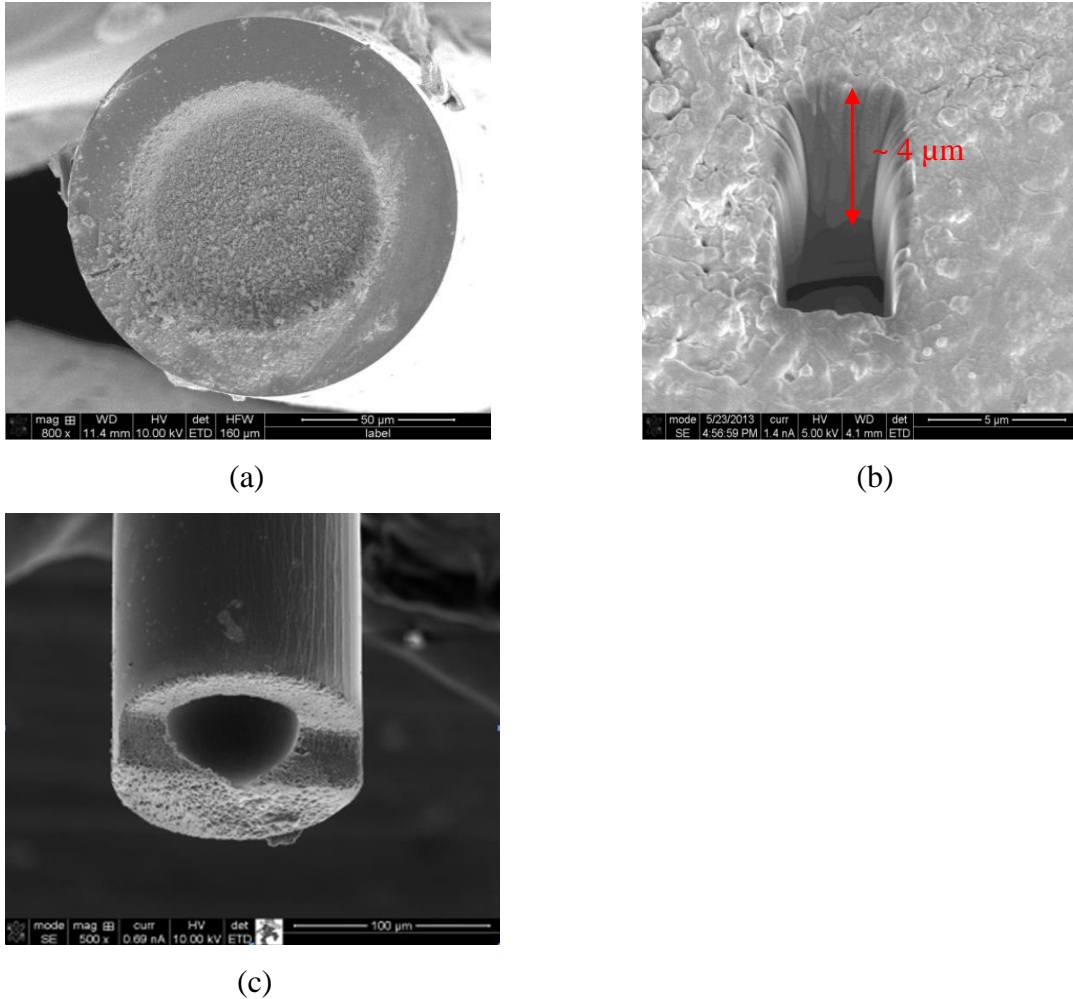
SEM images of femtosecond laser micromachined EFPI (a) laser drilled micro hole (b) lateral cut view of the diaphragm (c) cut out view of the sensor head
